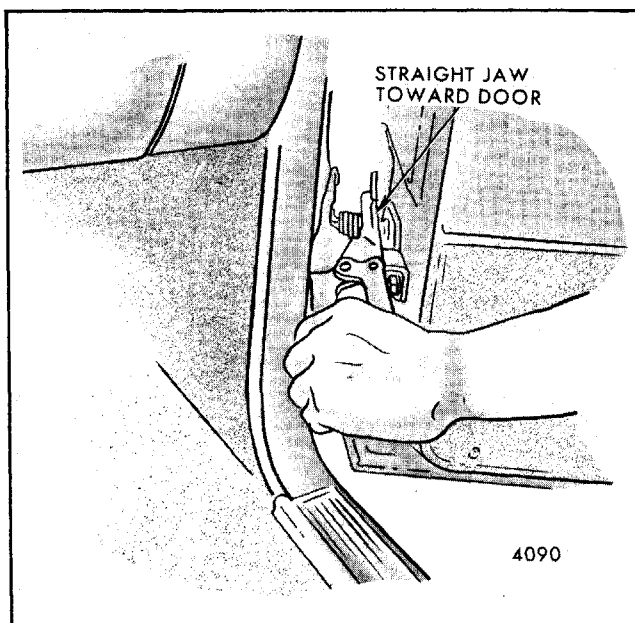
Front Door Hinge Hold-Open Spring Installation Using Tool J-23497 or Equivalent - "X" Styles
